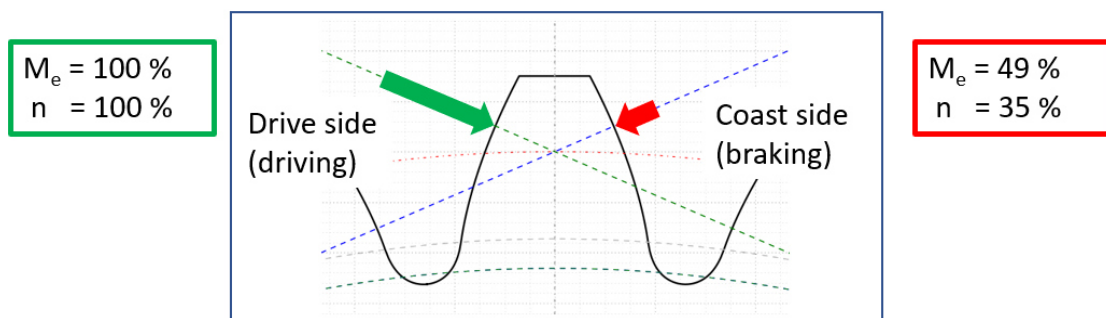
Loading conditions of the passenger car at both tooth flanks while driving and braking by ICE.
